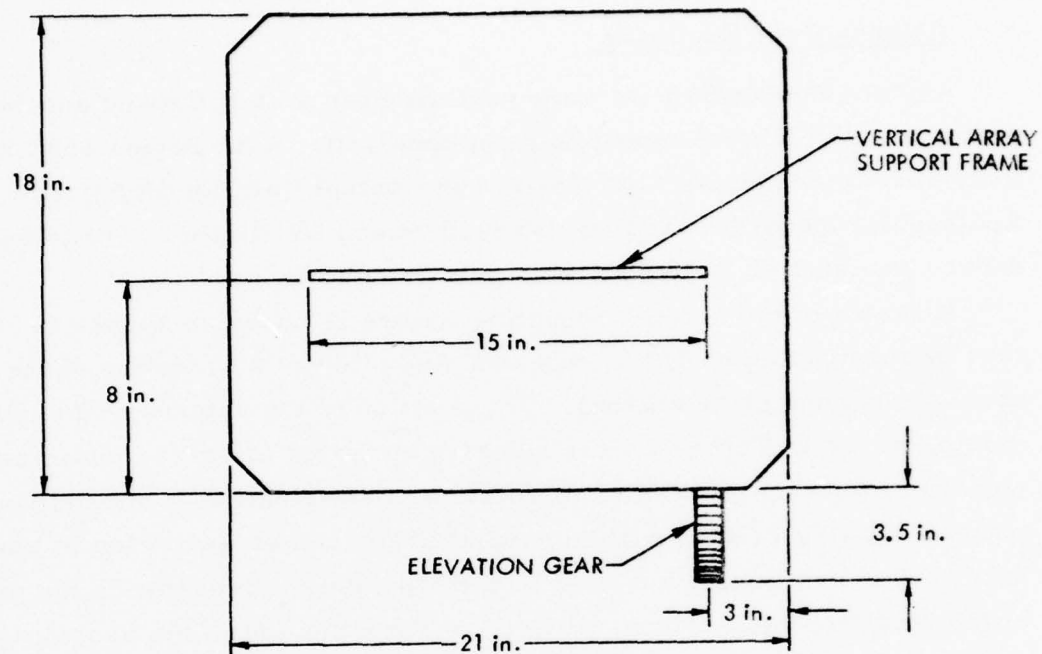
Plan View of Mounting Fixture on EL/AZ Mount
